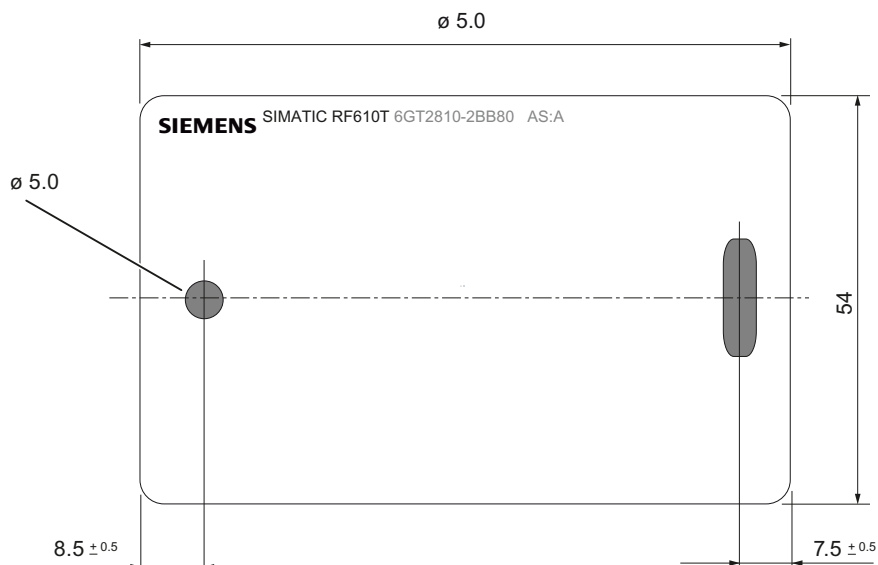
Dimensional drawing of SIMATIC RF610T
